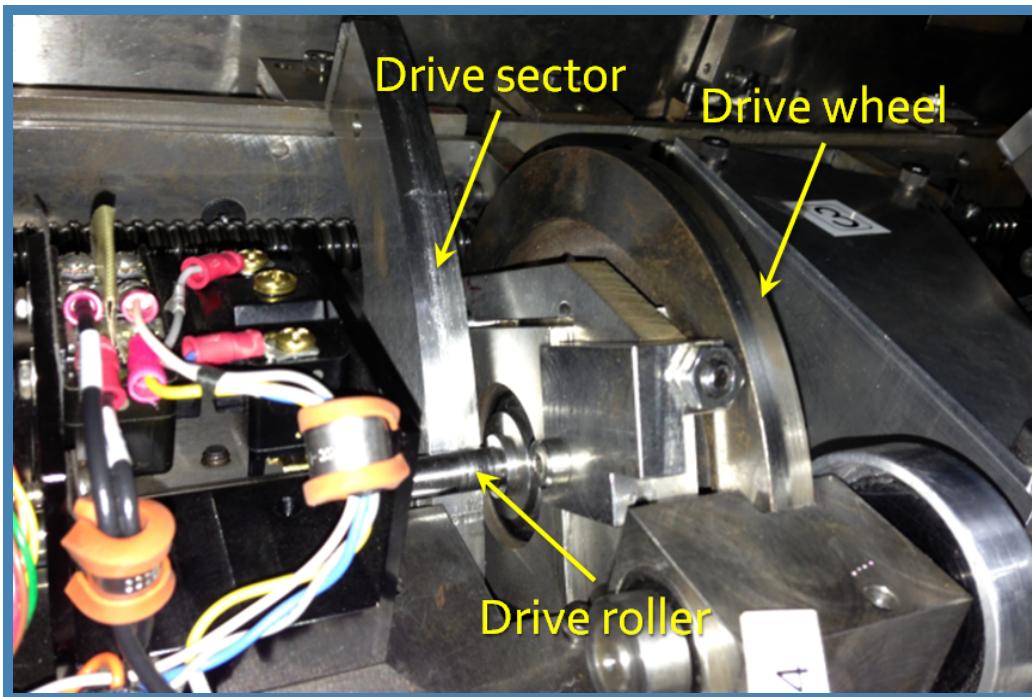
Close-up view of the grating tilt mechanism. The metal-on-metal contacts between the drive roller and drive sector show significant signs of wear, as does the drive wheel.
